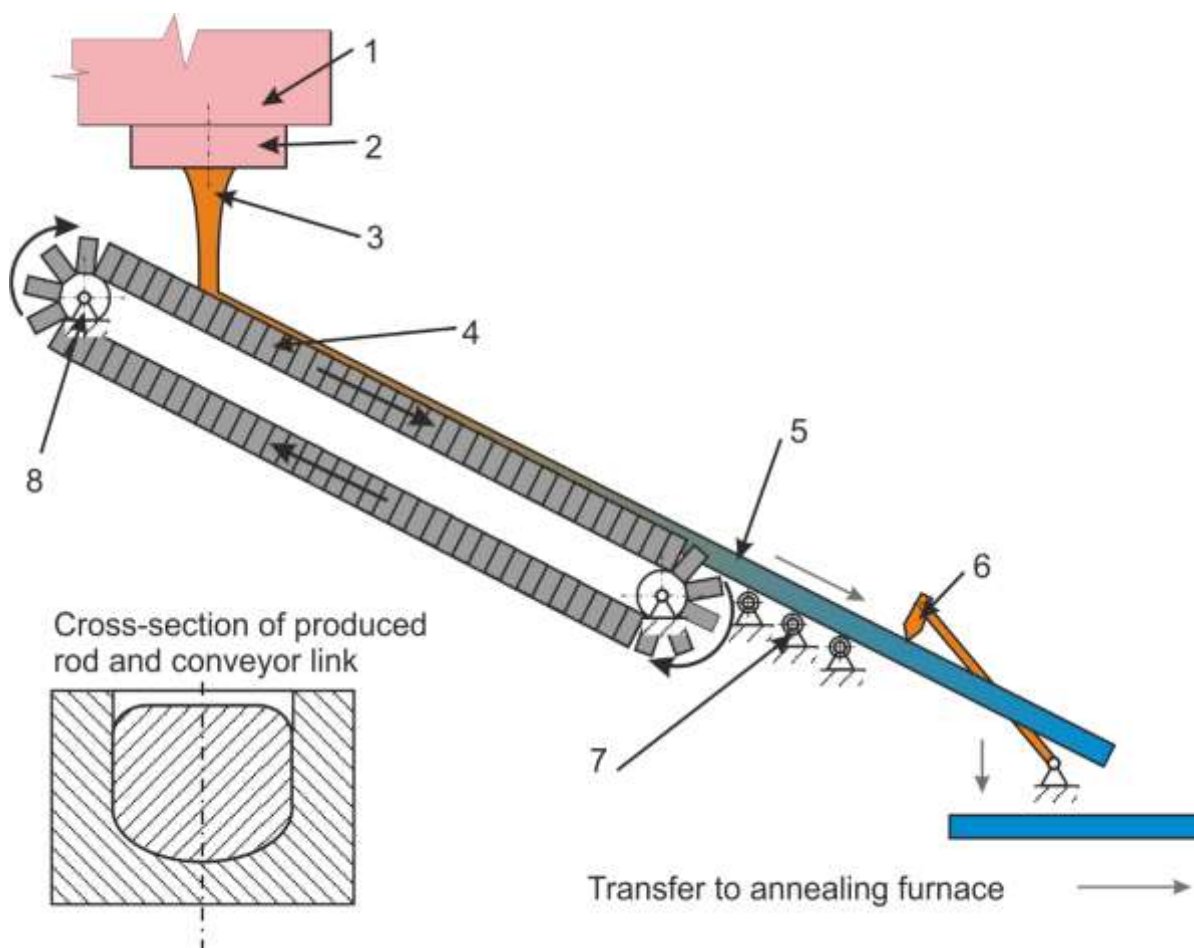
Diagram of machine production of pressing rods: 1 - pot furnace, forehearth of day or continuous tank, 2 - orifice ring with annular spout, 3 - spout of glass melt (around 1000°C), 4 - chain conveyor forming an "endless" mould, 5 - rod, 6 - cracking-off and breaking-off mechanism, 7 - curve rocket, 8 - machine frame
